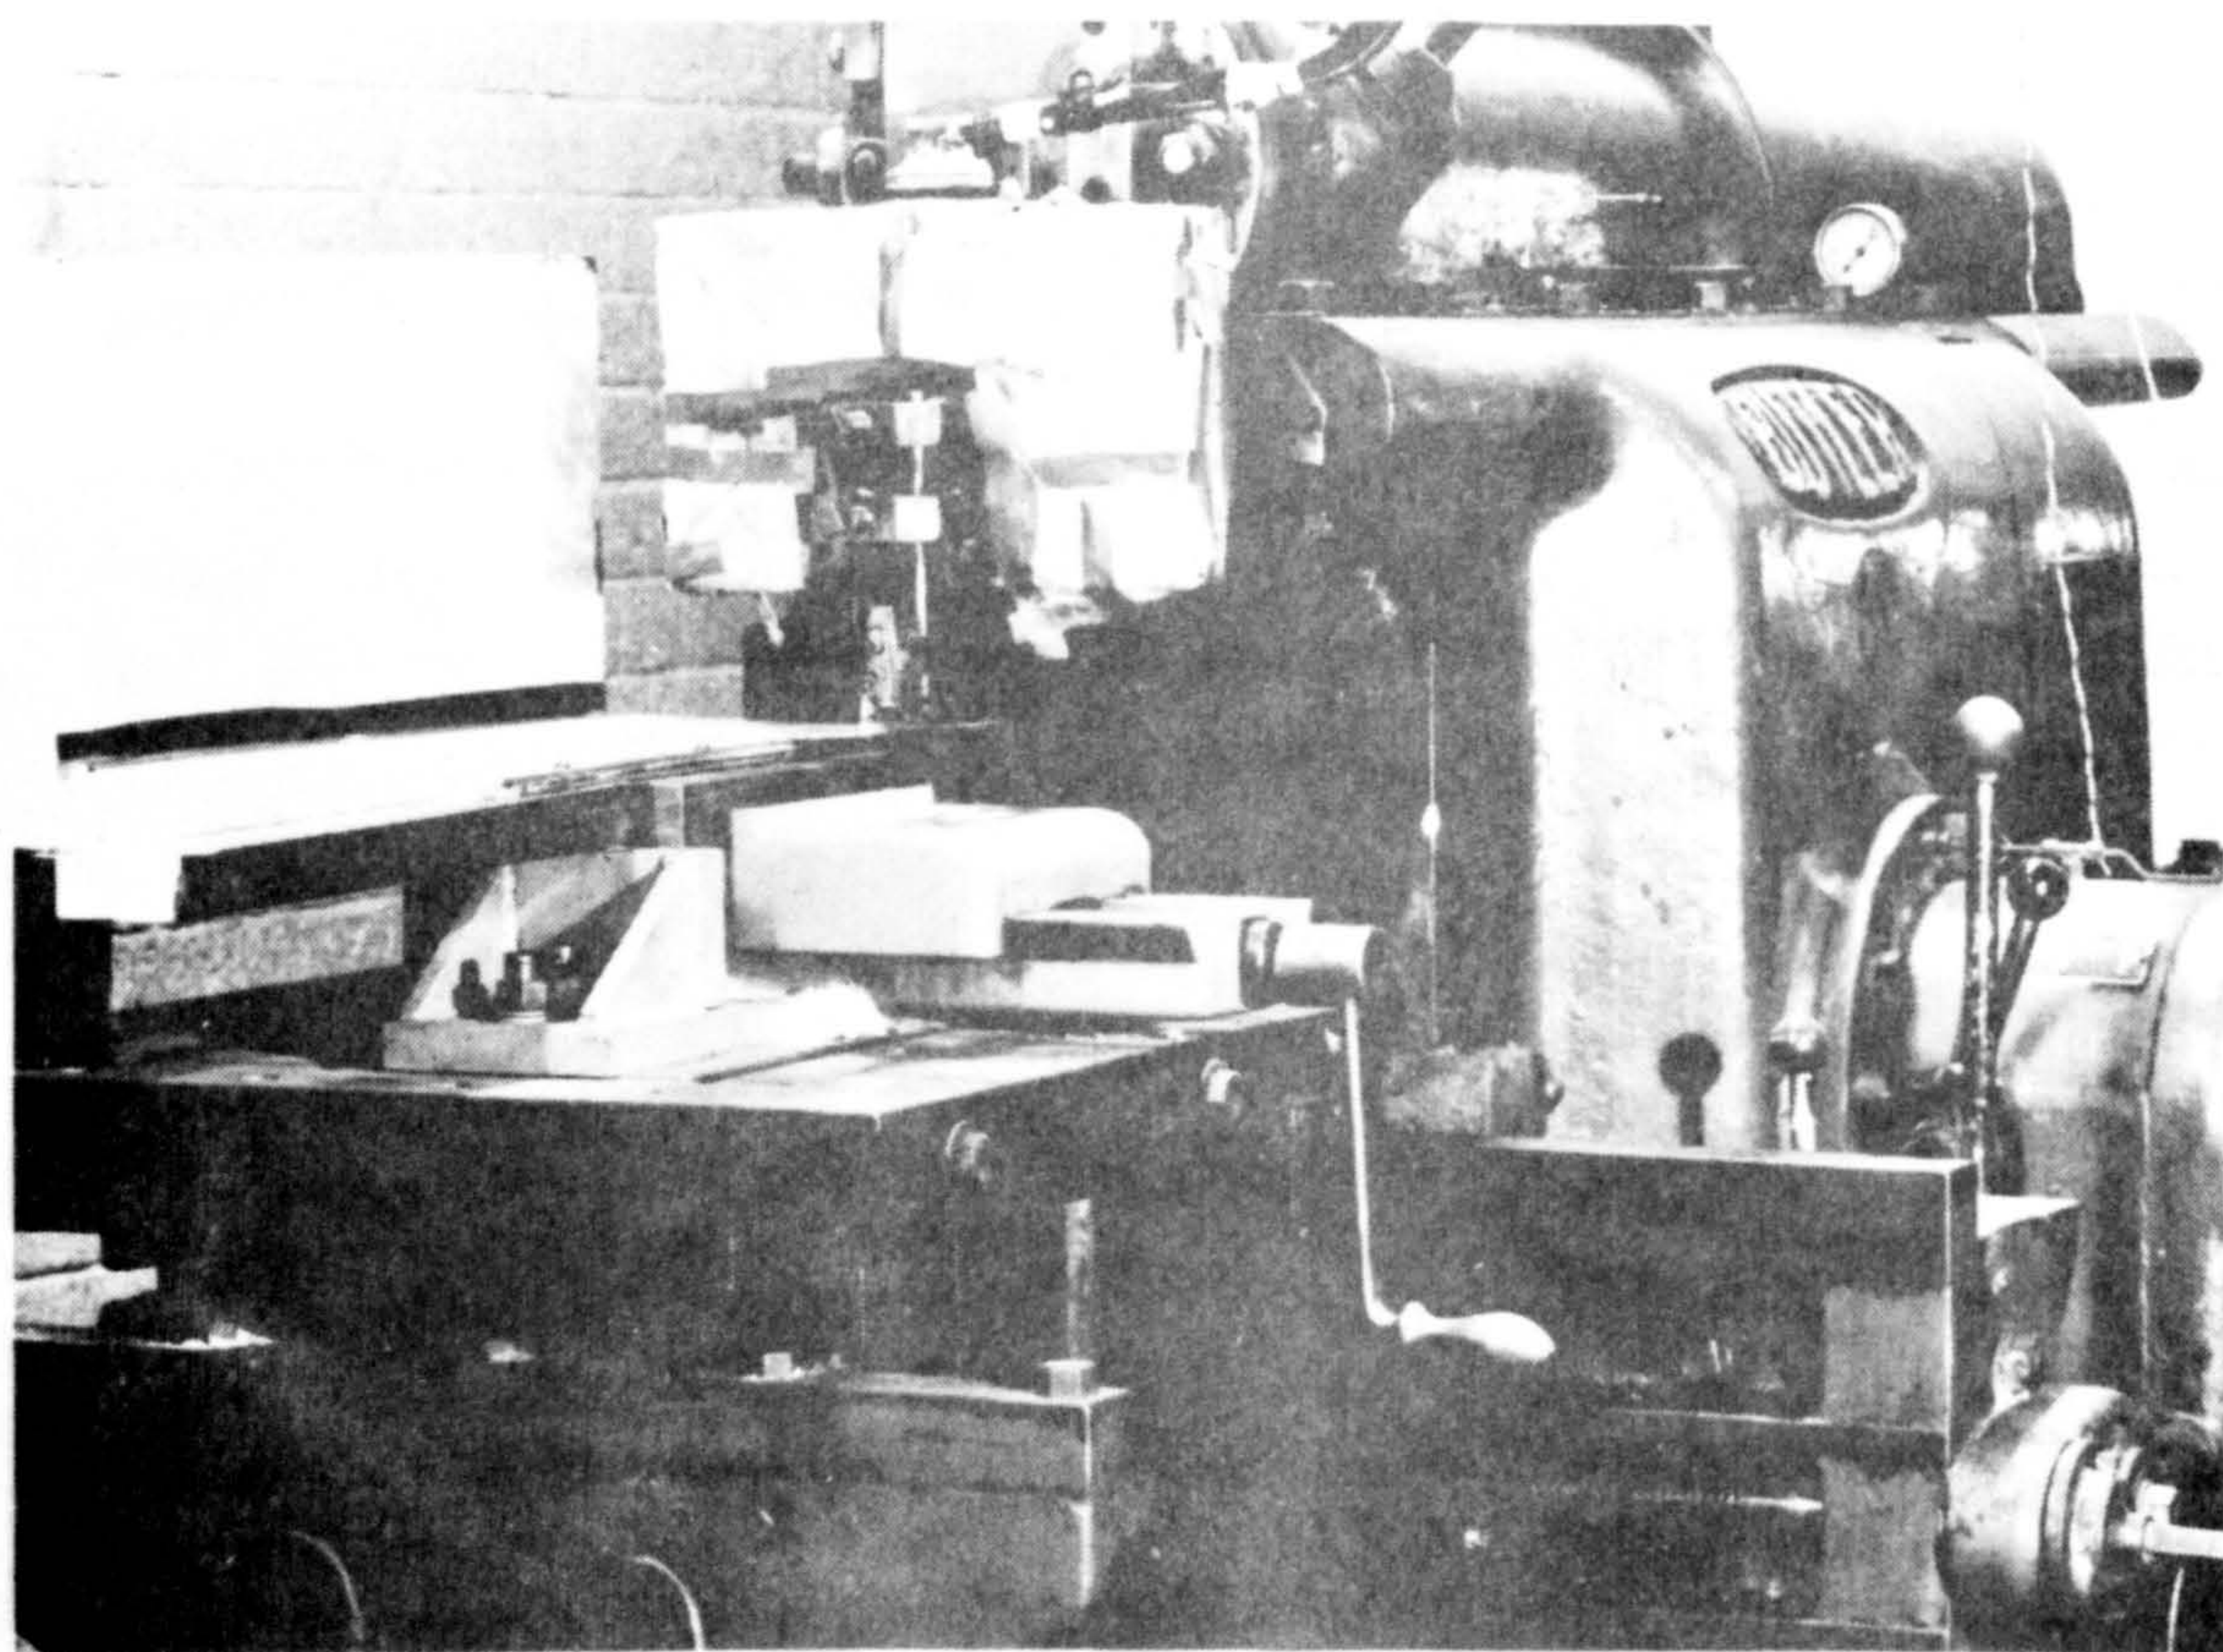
RIG ADAPTED FOR CORE CUTTING SHOWING VICE ASSEMBLY
